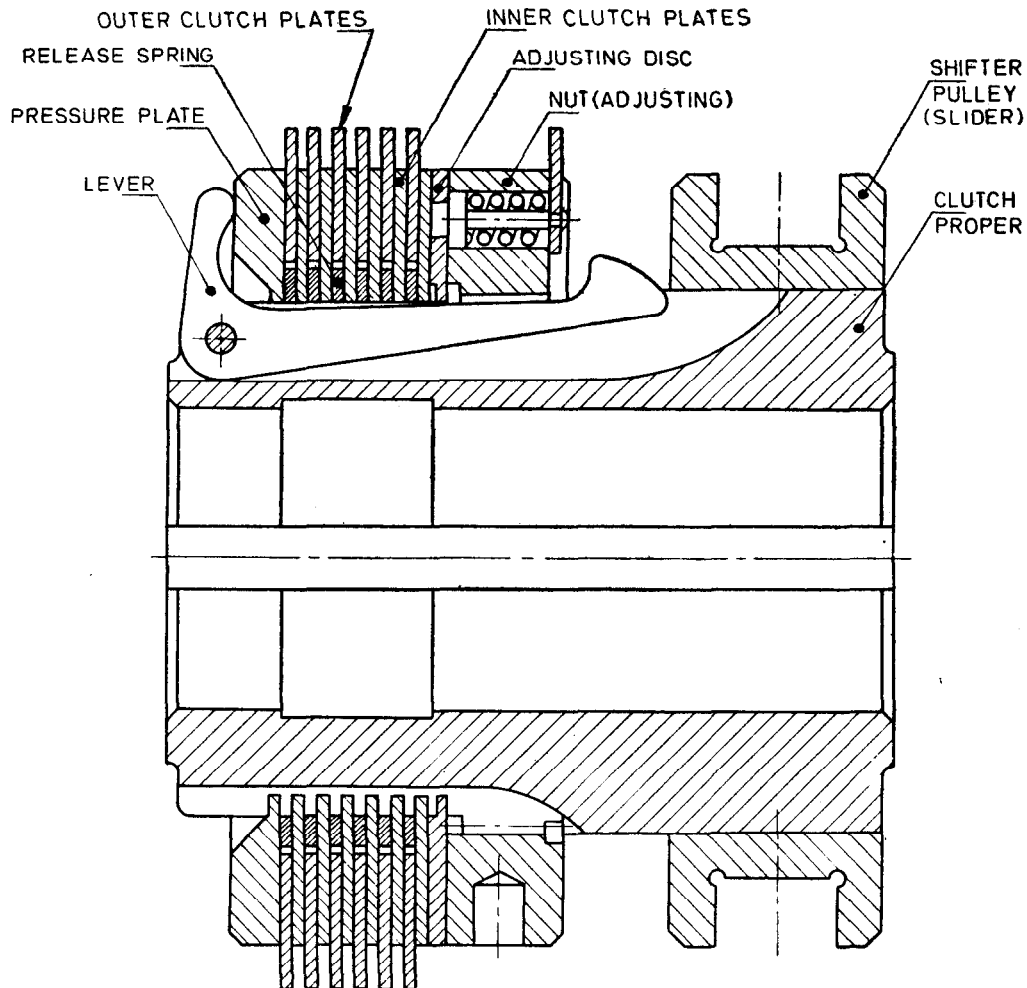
MECHANICAL MULTI-DISC CLUTCHES, SINGLE ACTING
